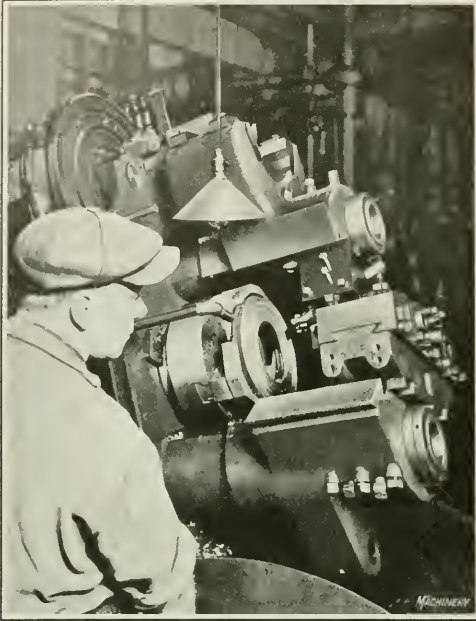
Hartness Automatic provided with the Tooling for machining a Ring Bevel Gear, shown in Fig. 9
